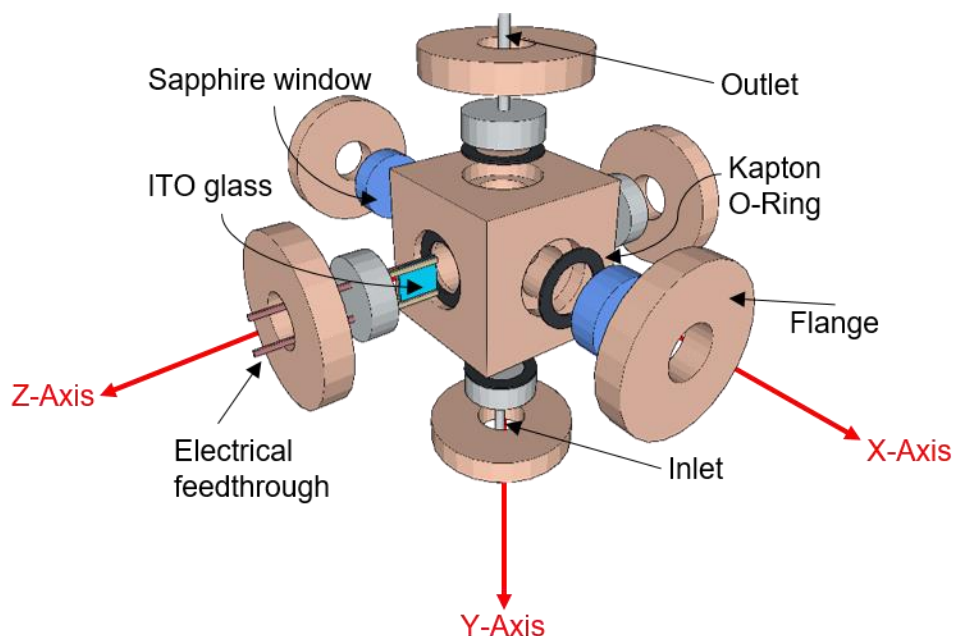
Drawing of the high-pressure chamber and some of its components. Bolts, heating elements, and mounting elements are excluded for clarity.
